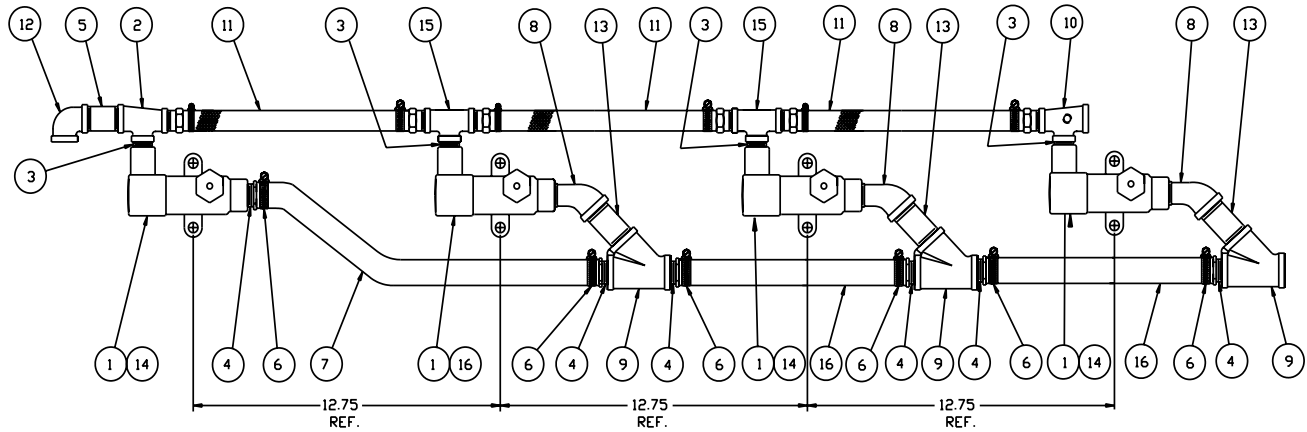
HEADER, STEAM AND EXHAUST ASSEMBLY
